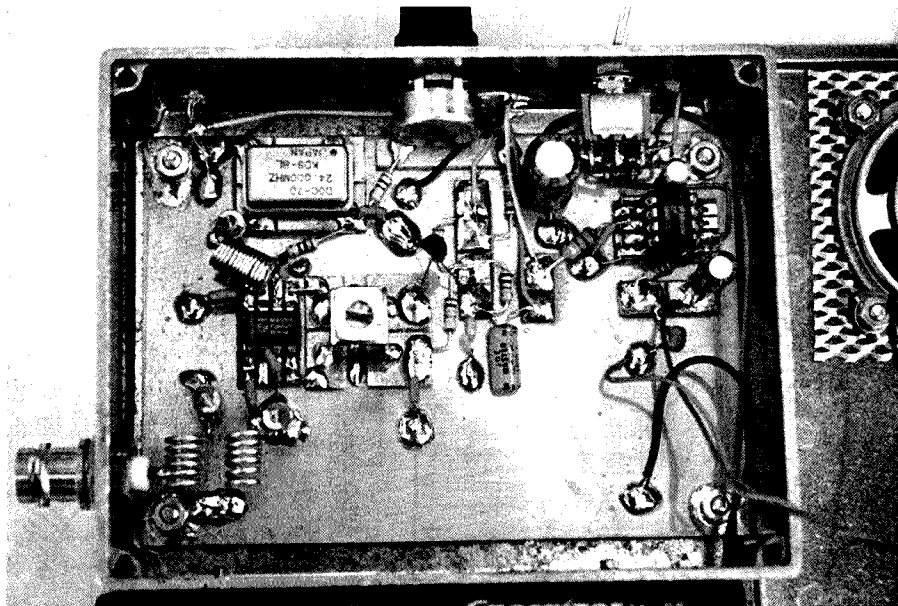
A view inside the receiver case showing the suggested layout of the components.
